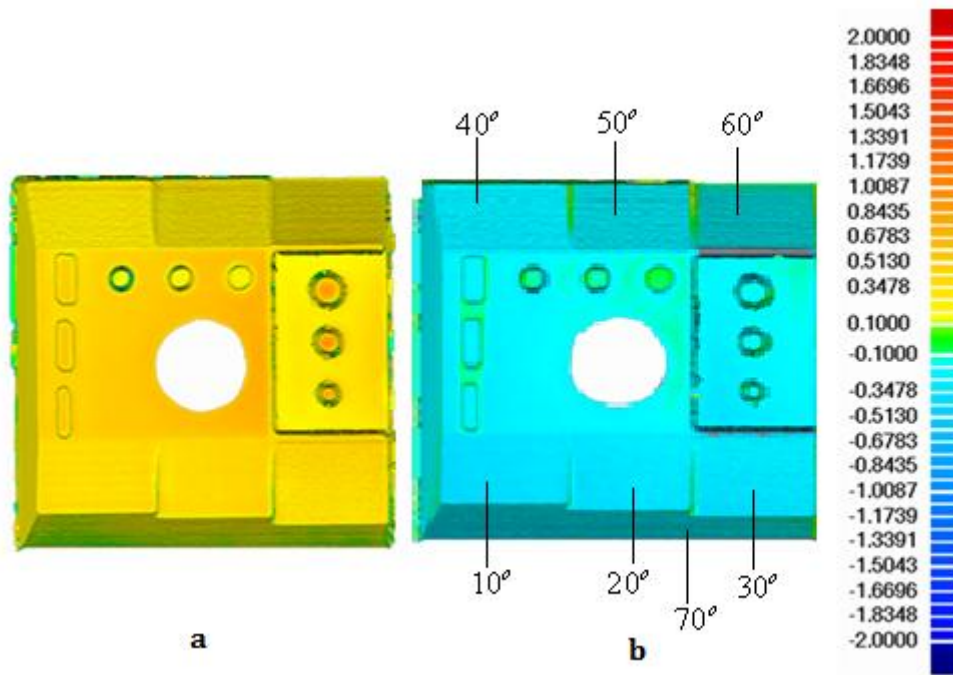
Touch probe scanned spray painted (a) and CNC machined (b) nylon test pieces
